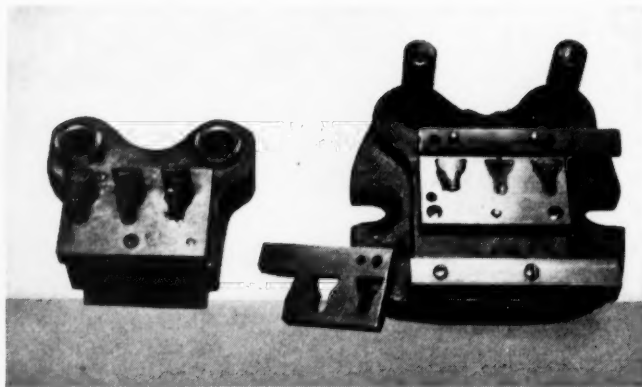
Die Used to Emboss and Blank Pieces D, Fig. 5, from Scrap E
